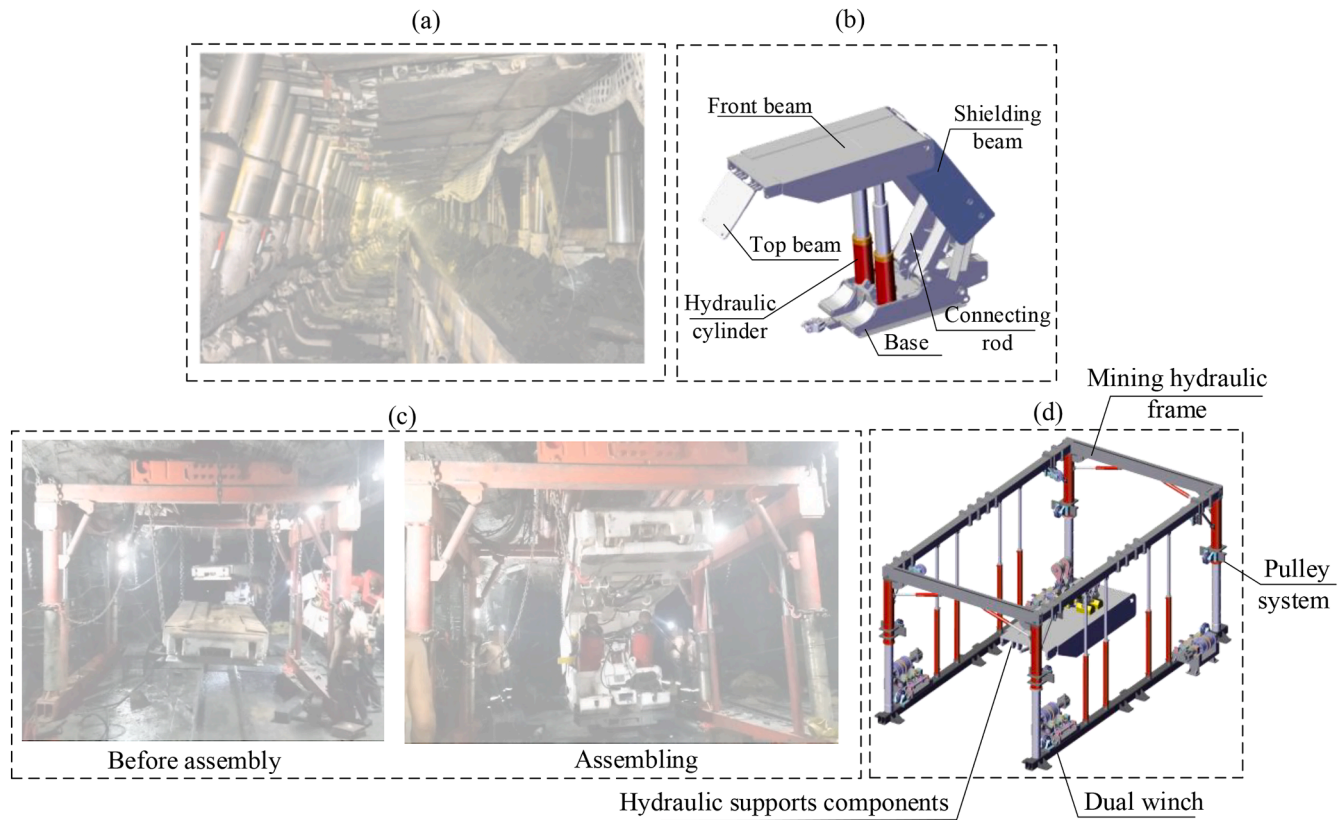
(a) Hydraulic supports mining faces; (b) Composition of hydraulic support; (c) Mining hydraulic frame working drawing; (d) UMC DPR schematic.
